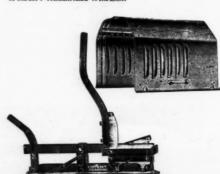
AMES MACHINE FOR CUTTING LOUVRES IN FORD HOODS
